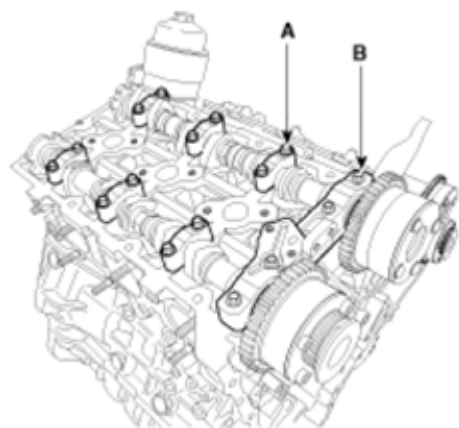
Identifying Camshaft Bearing Cap & Thrust Bearing Cap (2 Of 2)
